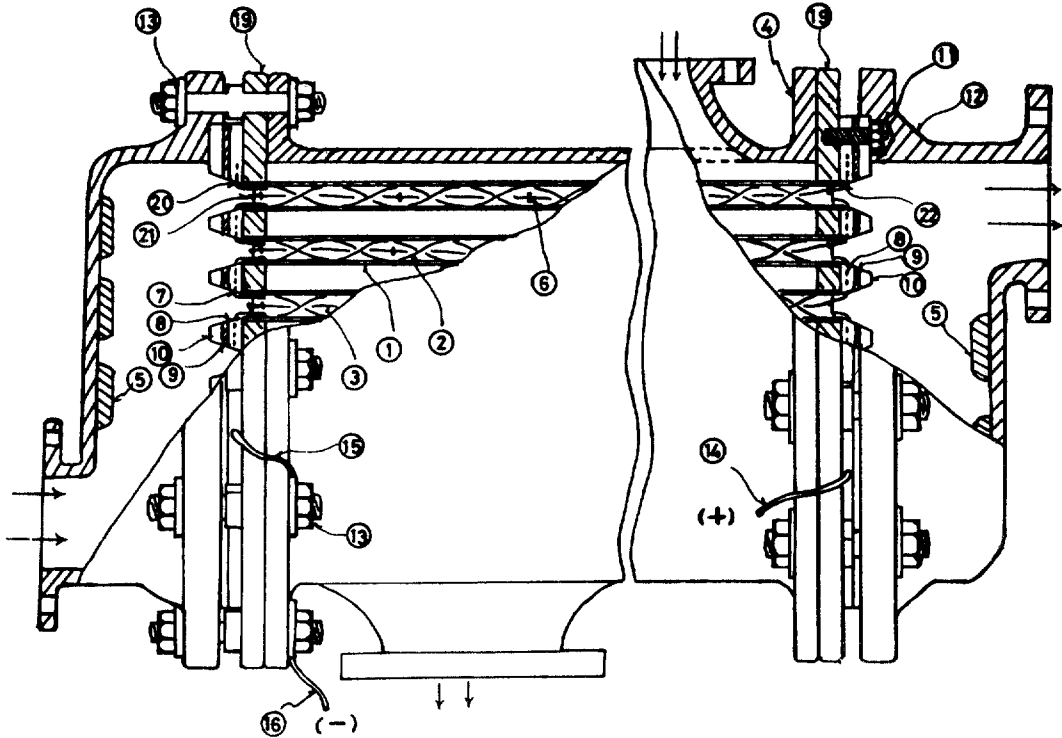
A Section View of the Heat Exchanger equipped with the Direct Protective Device for Inner Surface of Cooling Tubes.
